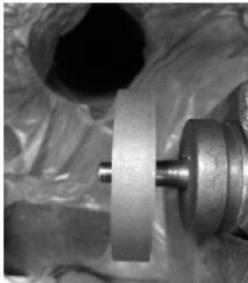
The surface condition of the grinding wheel after electric machining [44].
